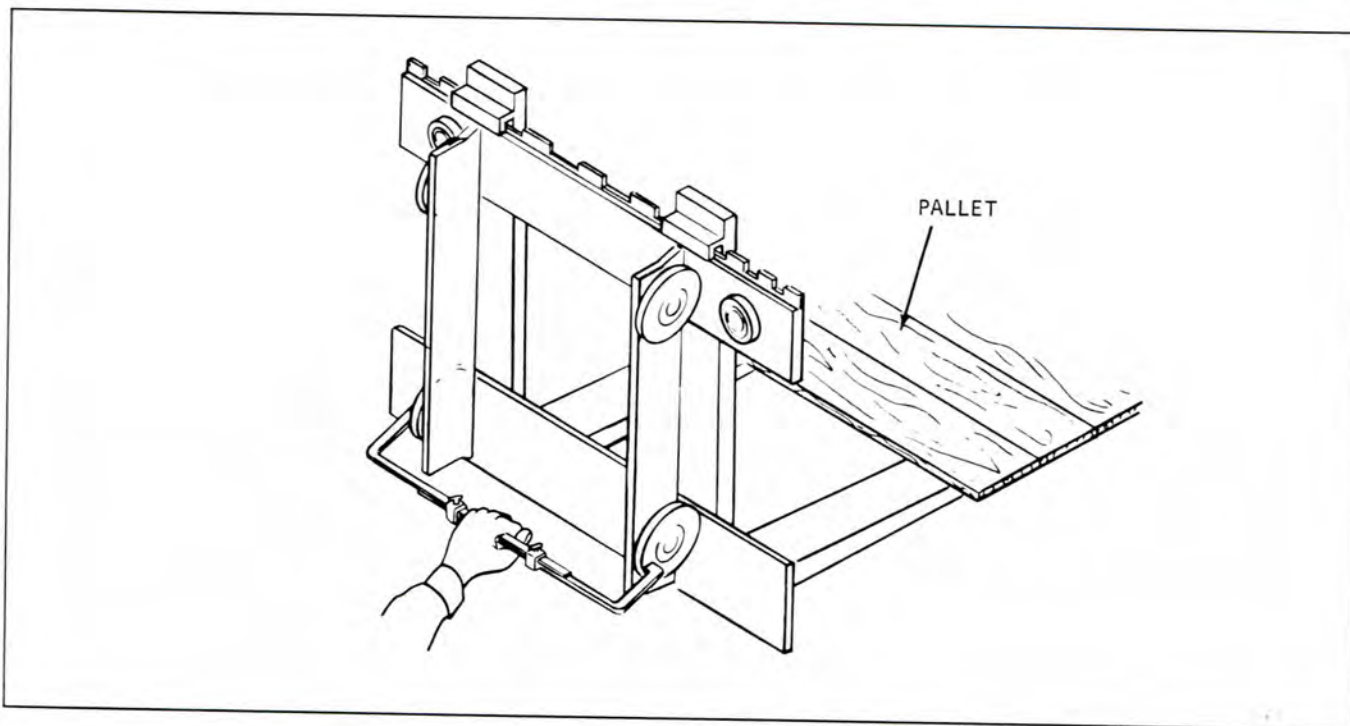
Spanning Lower Rollers (Four Roller Carriage)
